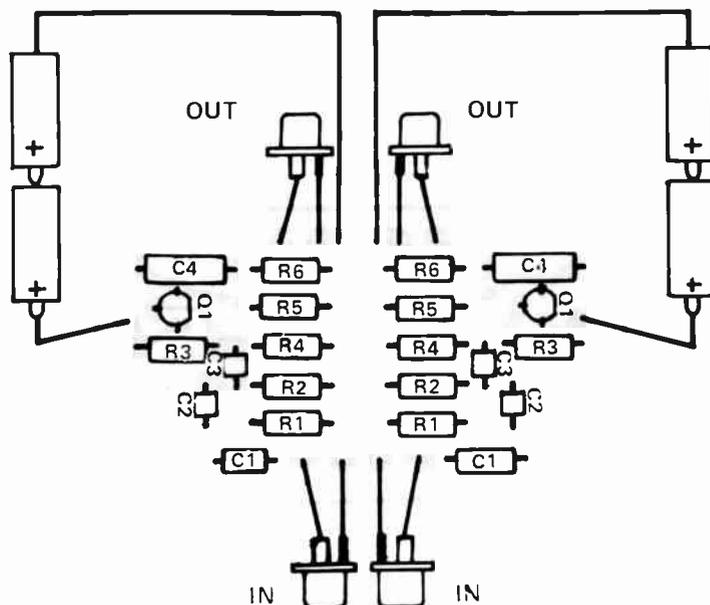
Printed circuit board layout for the rumble filter 40mm x 70mm.
